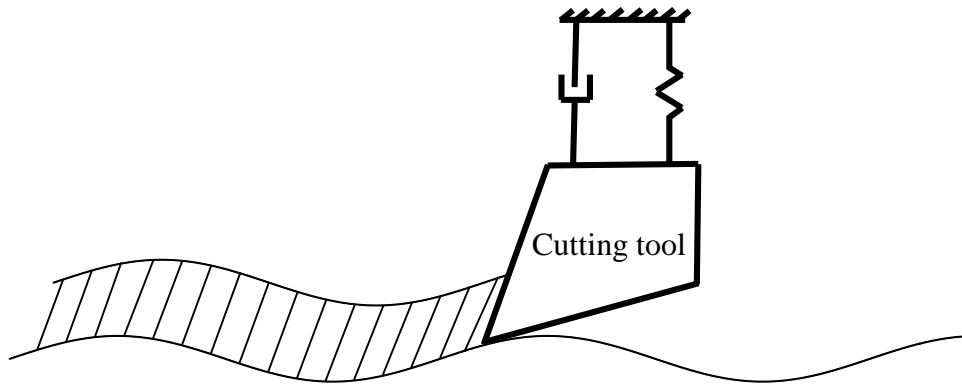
Waves left on workpiece surface at elevated surface cutting speeds.
